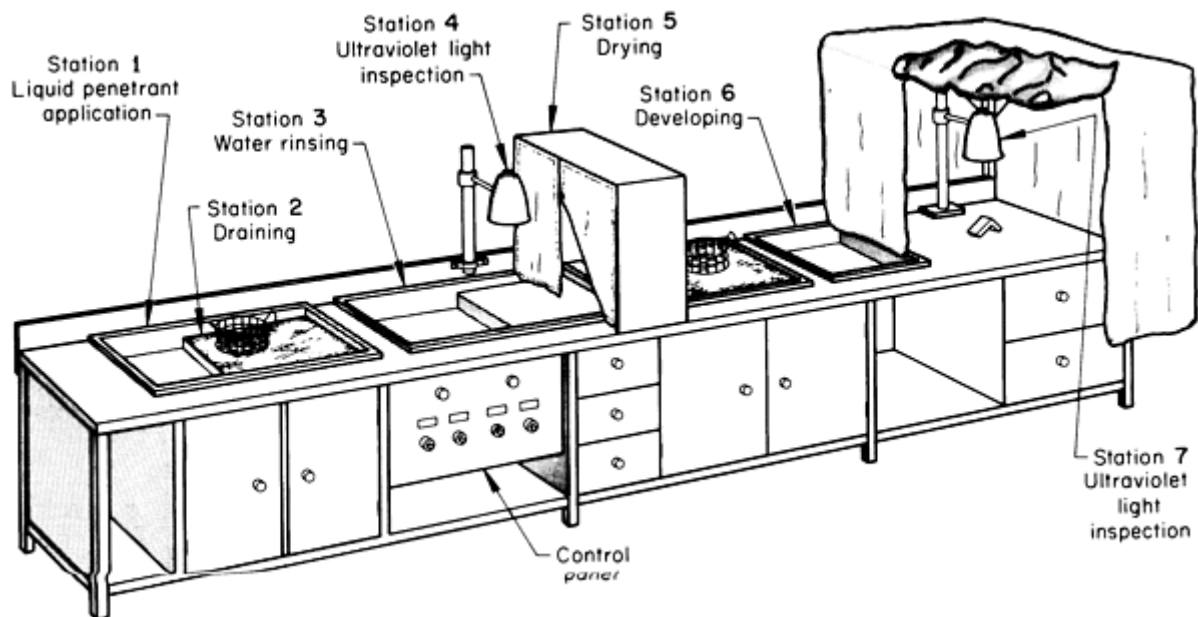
Typical seven-station package equipment unit for inspecting workpieces by the water-washable fluorescent penetrant system
